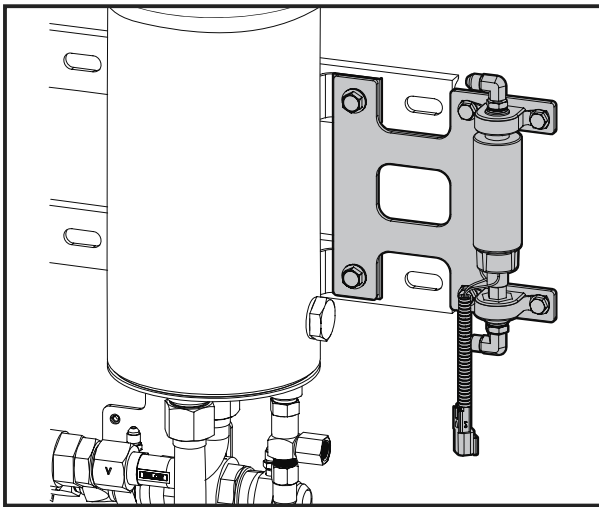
Mounting the Primer Pump Assembly on the Bracket
